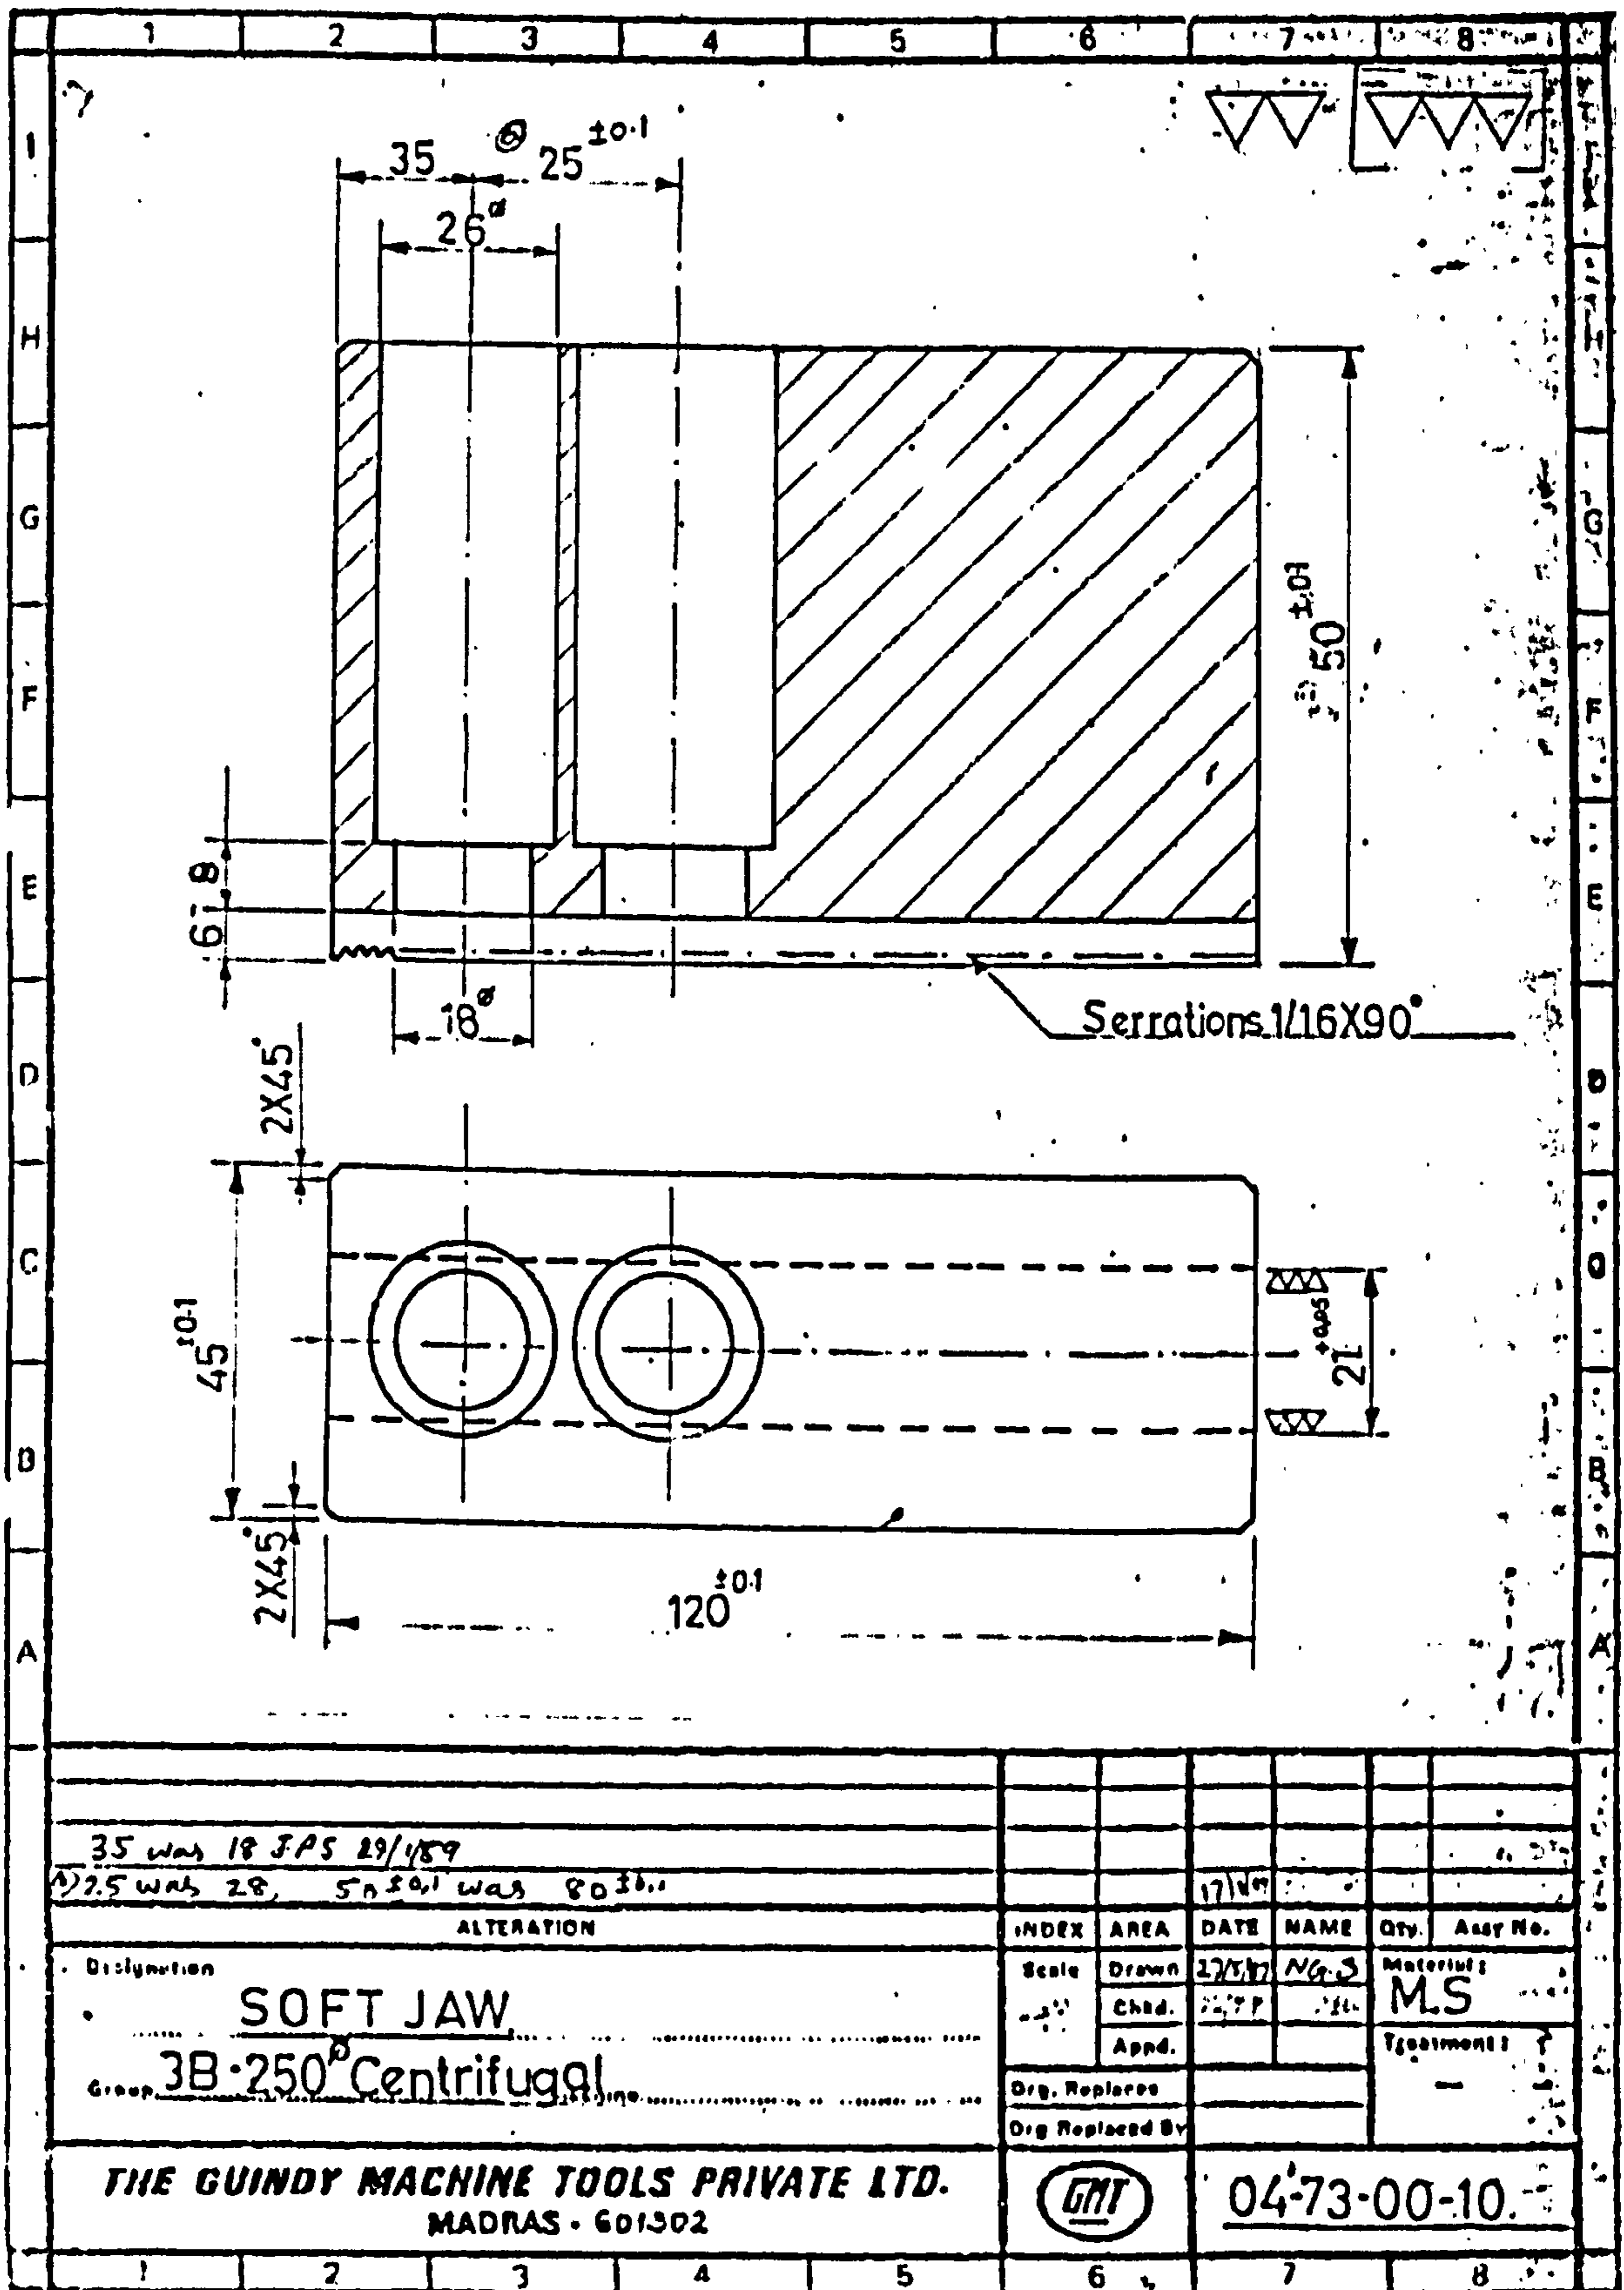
GMT Chuck Soft-Jaw – Example Manufacturing Drawing
